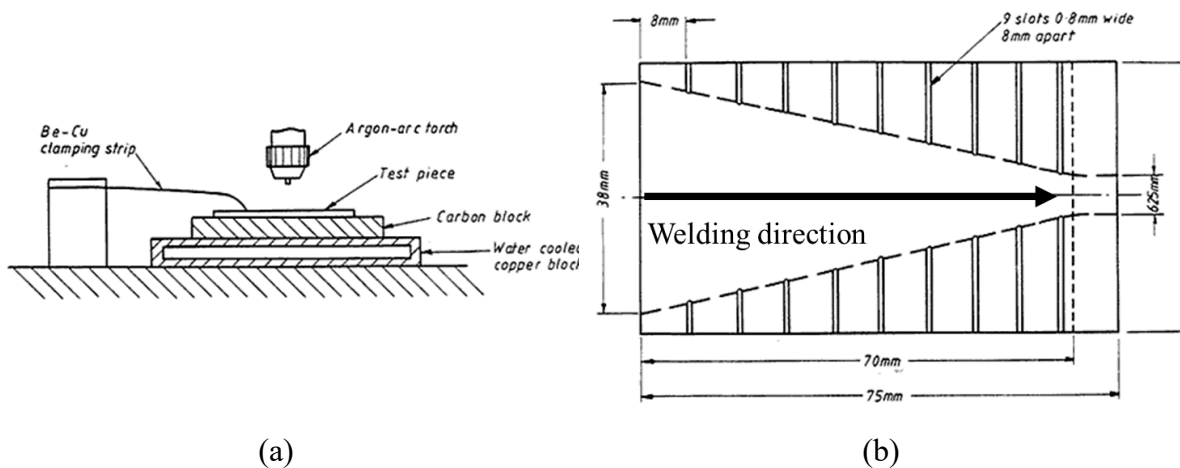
Experiment set up (a) and specimen dimensions (b) of the Houldcroft test [Hou55].
